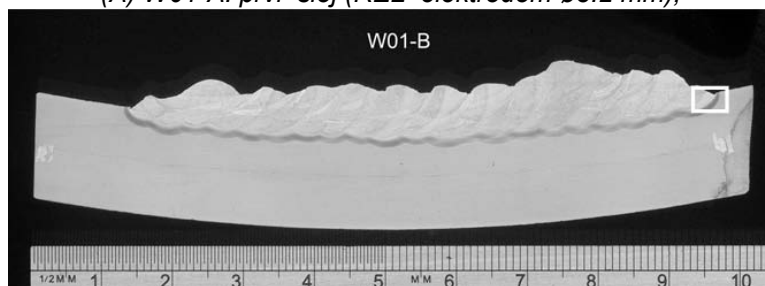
Macrosections taken through test weld W01. Scale ruler shown:
